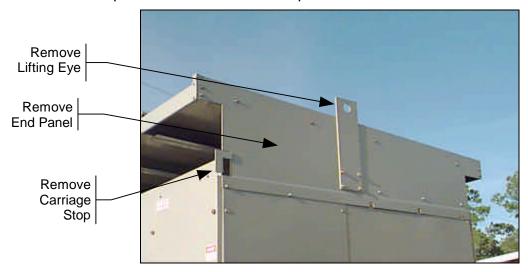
Remove the Lifting Eye, Carriage Stop and End Panel.
